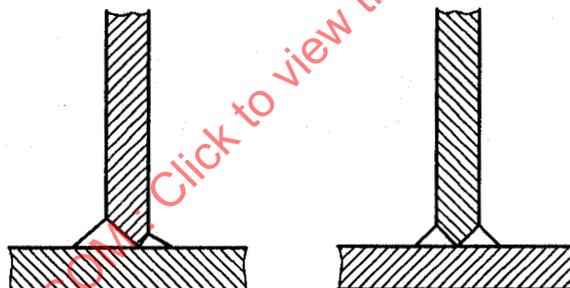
Typical methods of welding girder stays to reversal chambers (continued)
